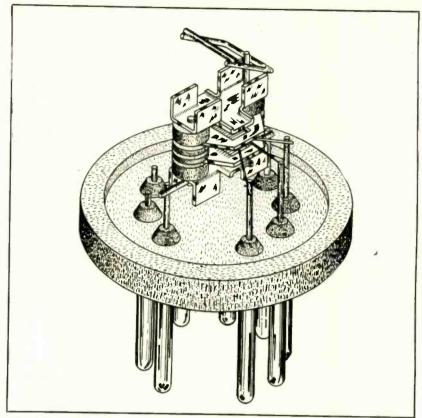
Type SN-1724D mount as assembled on ceramic stem. All elements are stacked on two vertical pins and positioned by ceramic spacers
